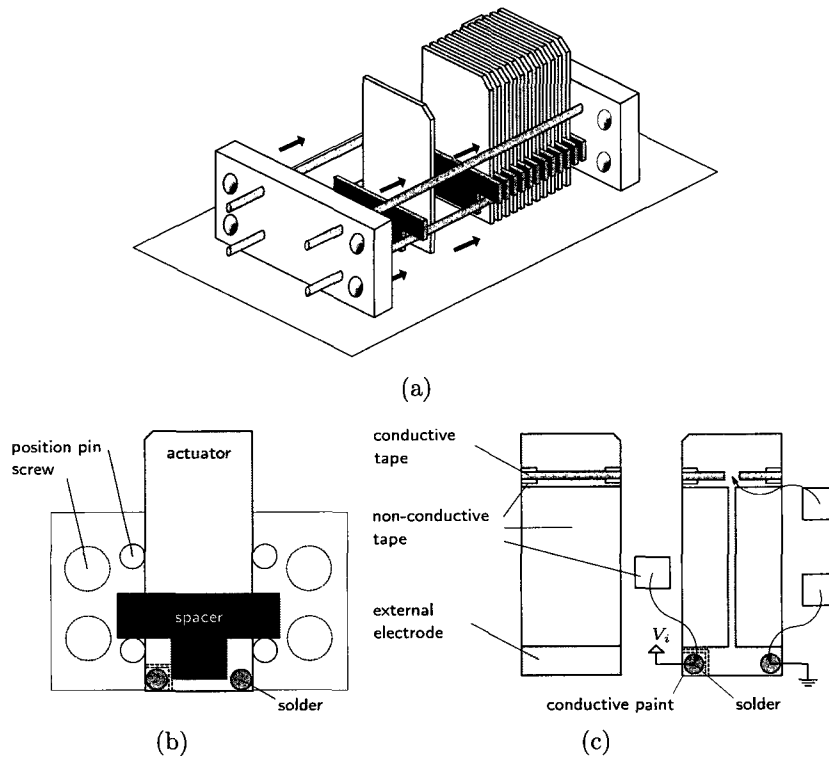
Assembly of the VBD's tactile display: (a) perspective and (b) frontal views of stacked assembly, and (c) actuator fabrication process.
